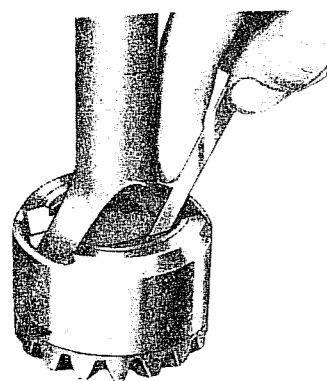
Measuring the axle shaft to fulcrum plate clearance. - Swing axle.
